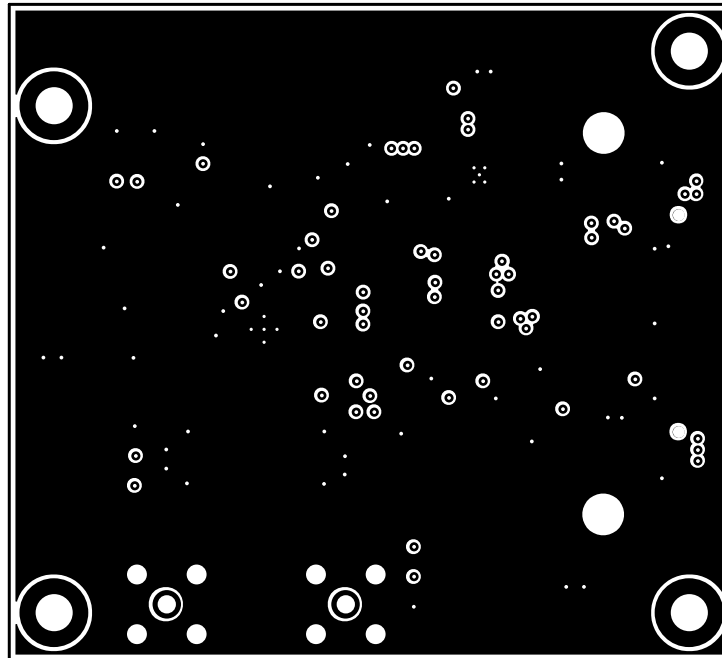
ADS8681WEVM PCB Layer 2 – GND Plane
